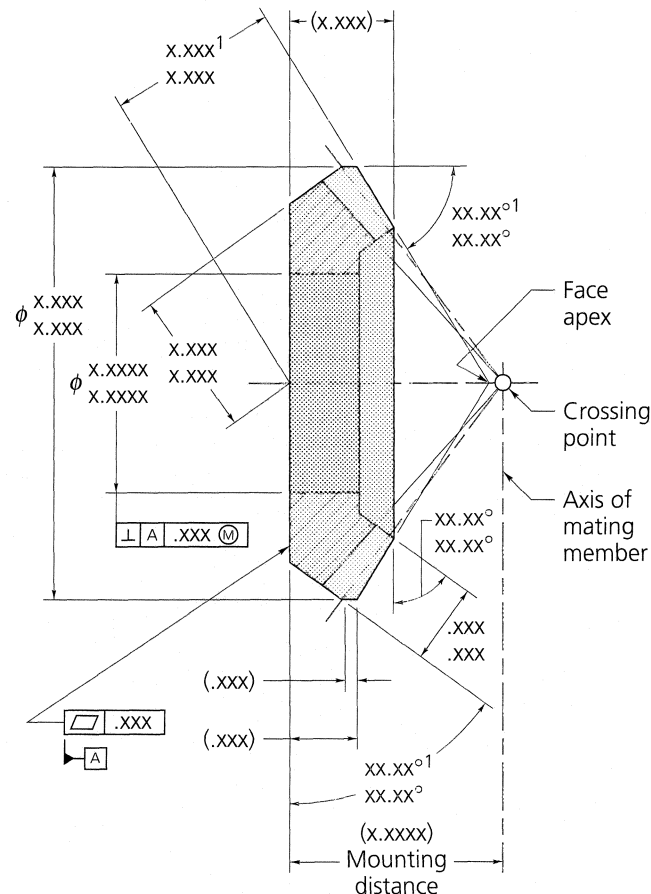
Dimensions Required for Spiral Bevel Gears
